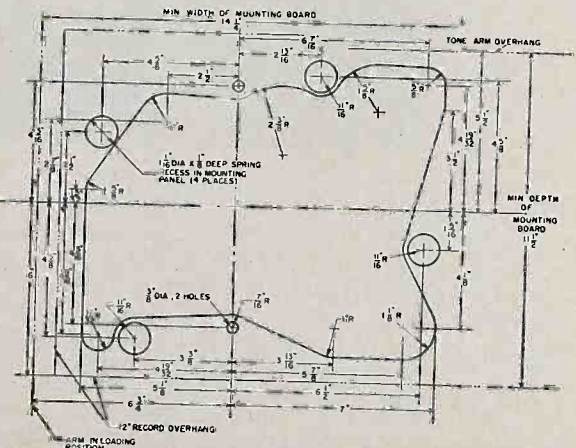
P12 AND P14 PANEL CUT-OUT DIMENSIONS
